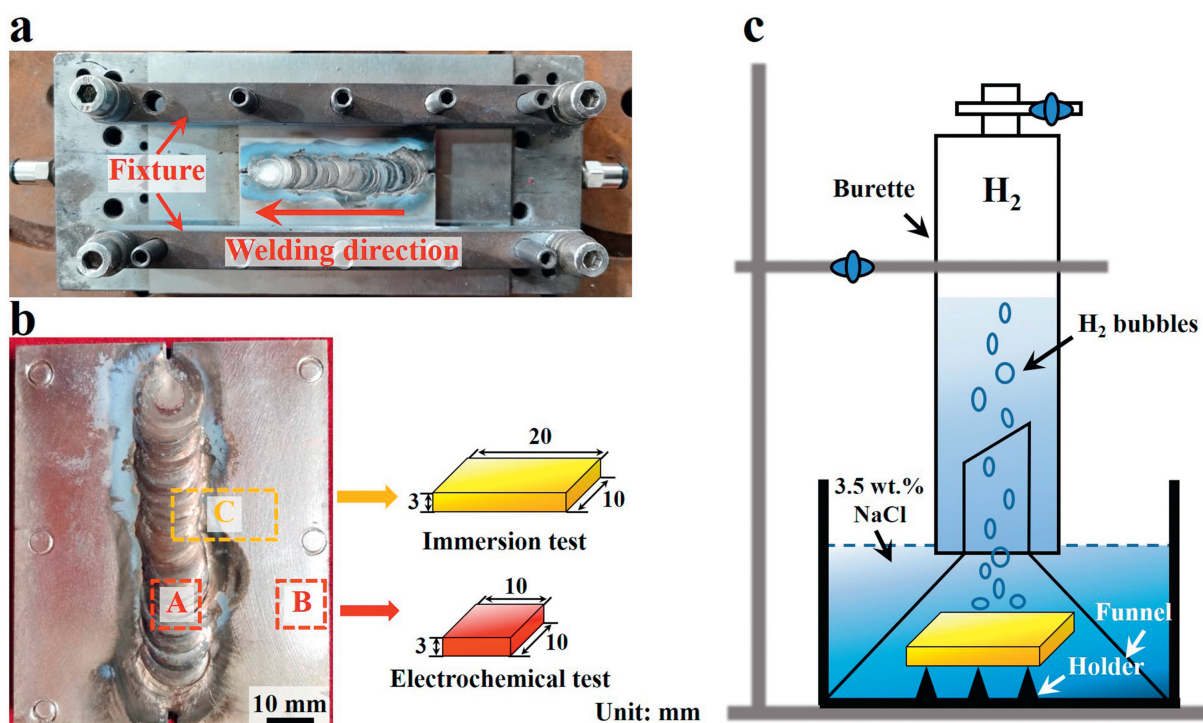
Schematic of the (a) welding fixture, (b) the sampling positions and dimensions of the samples used for immersion and electrochemical tests, and (c) the set-up used for the hydrogen evolution test.
